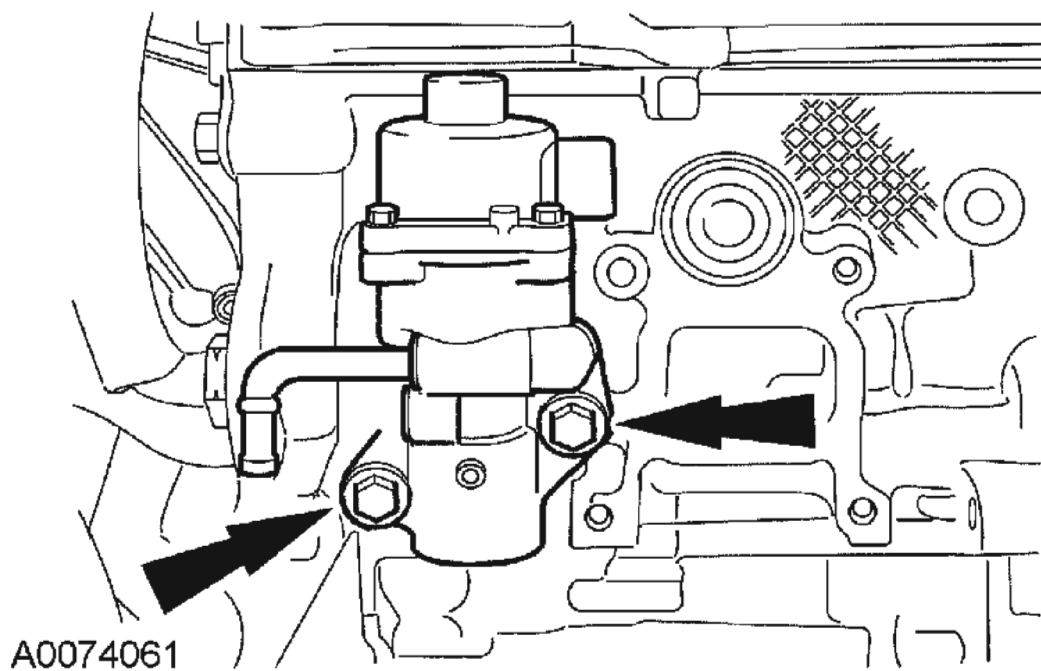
Removing Bolts And Exhaust Gas Recirculation (EGR) Valve
